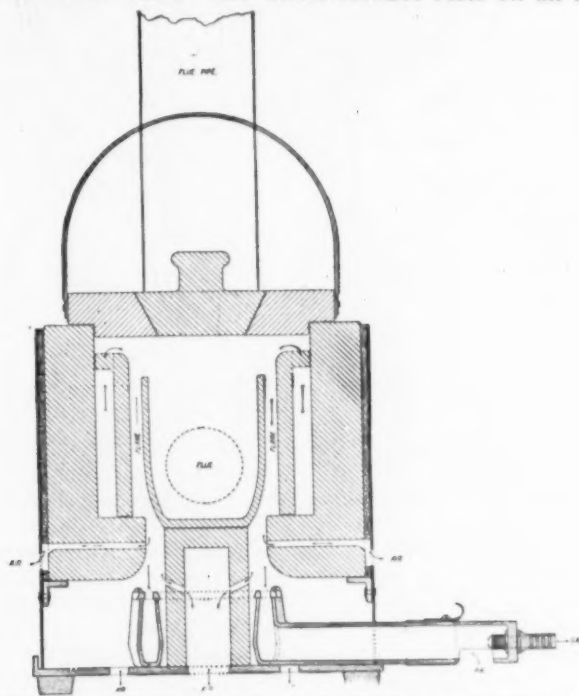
SECTIONAL VIEW OF RICHMOND GAS FURNACE.
